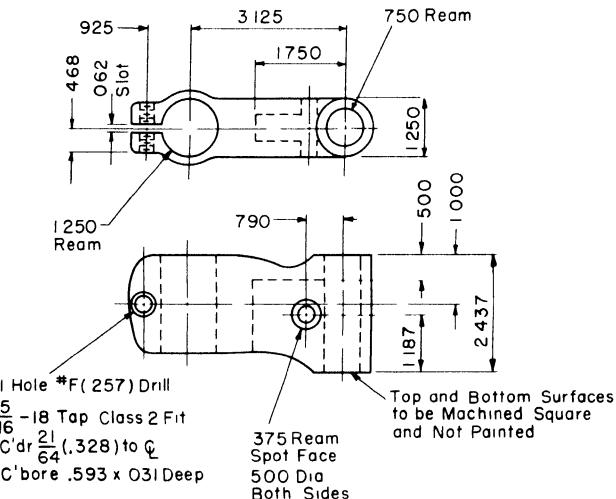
Drawing that shows how notes are used to supplement dimensions.
